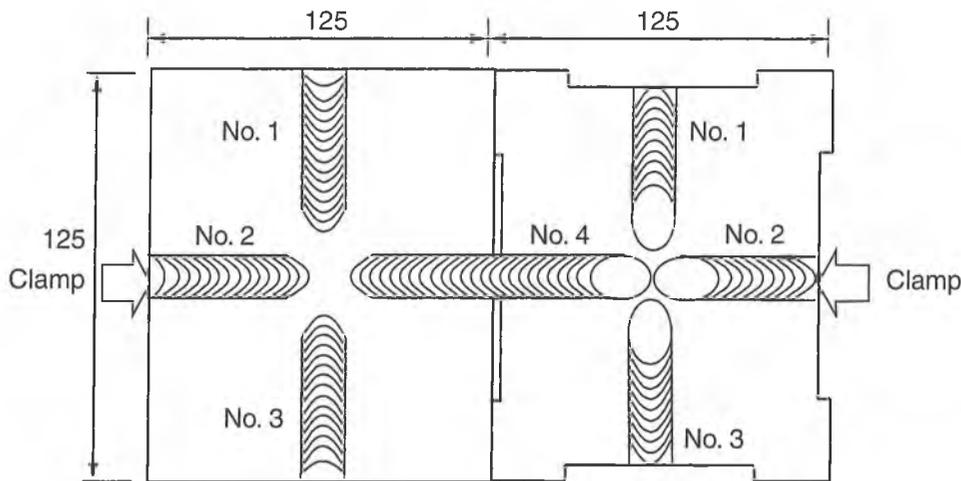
Schematic diagram of the G-BOP test block design that allows four weld beads to be deposited on each test block. Note: all dimensions in millimetres [not to scale].
